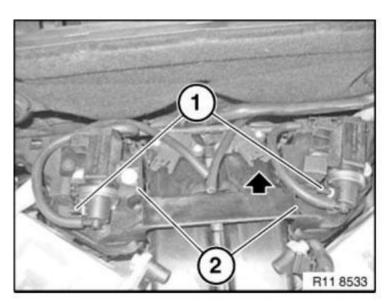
Identifying Charging Pressure Sensors And Cable Strap Holder Courtesy of BMW OF NORTH AMERICA, INC.
